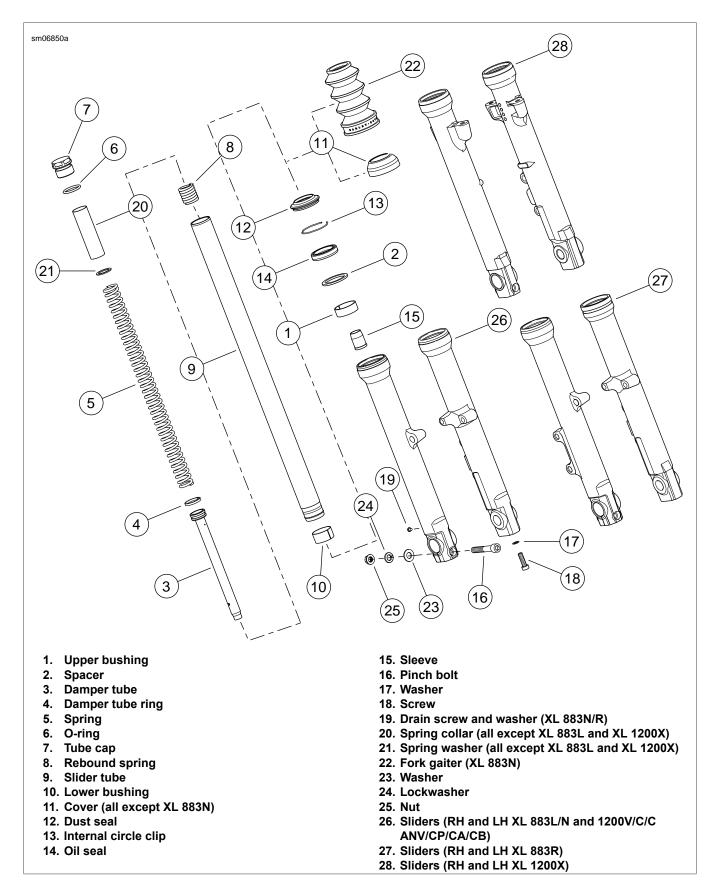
Front Slider Tube/Slider Assembly: XL Models
